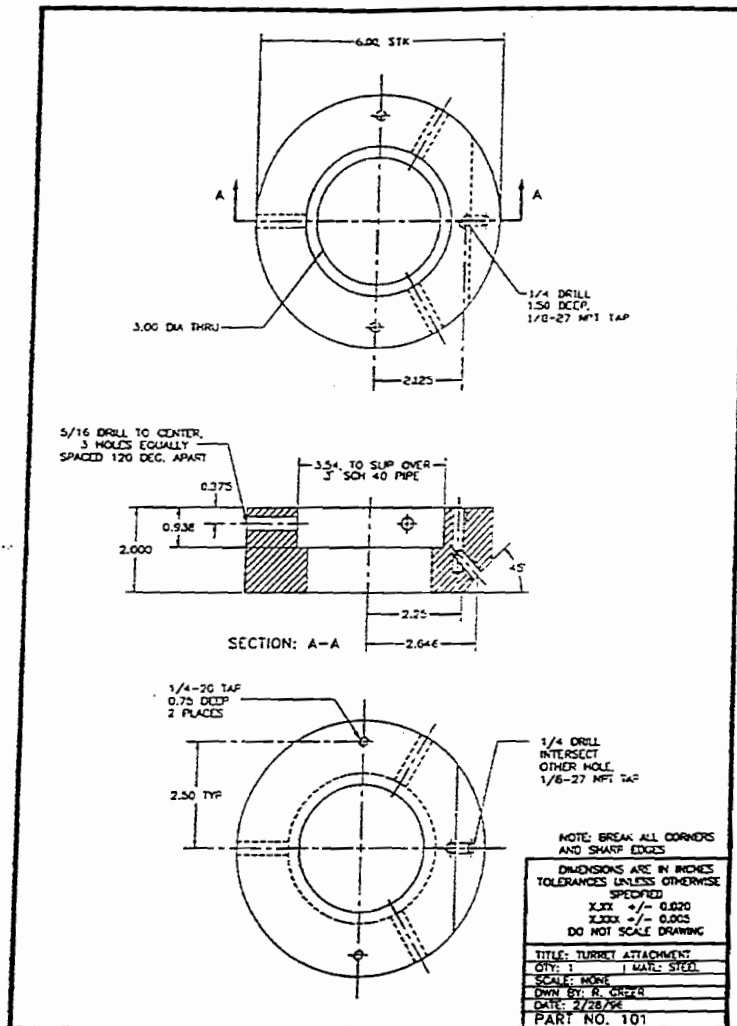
Turret Attachment Drawings -Manufactured by the Automated Construction Laboratory
